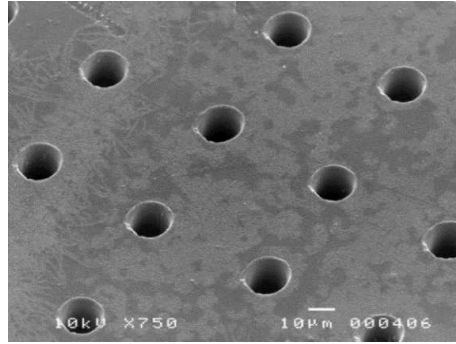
Micro-holes with a diameter equal to 15 μm , an example of MUSM machining.
